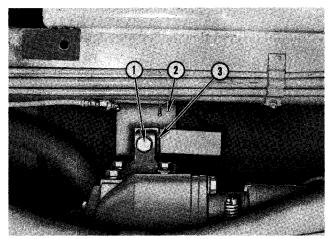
REAR ENGINE MOUNT 1. Mounting Bolt 2. Mount 3. Shims
